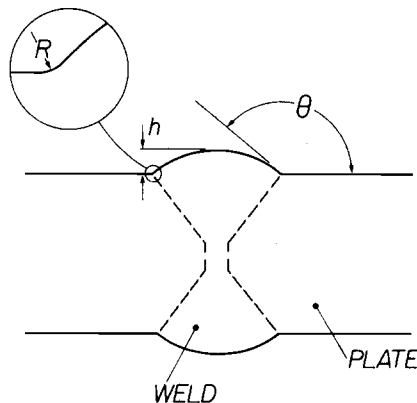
Schematic representation of a butt weld in terms of weld height, h , weld angle, θ , and toe radius, R .
